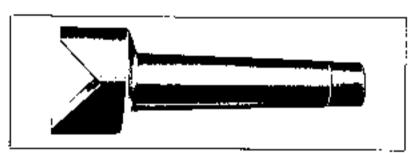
Solid V Center head is 11 in diameter and has groove 90° included angle 56" wide. Used in tailstock for holding cylindrical work when drilling and spotting to transverse center
